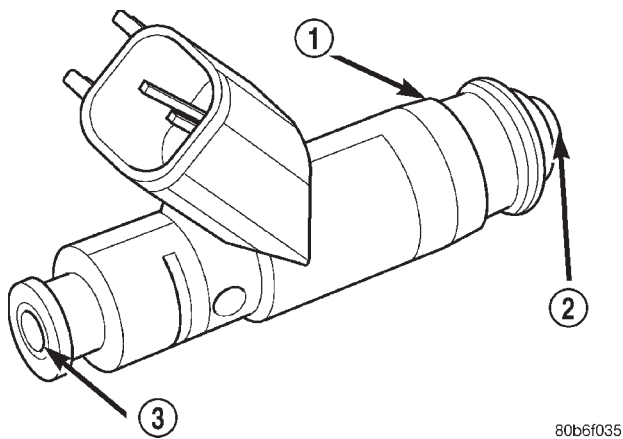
Fuel Injector—4.0L/4.7L Engines
